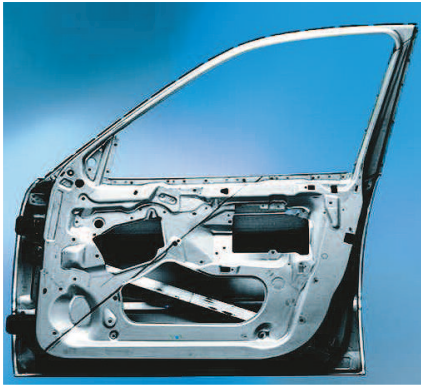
Automobile interior door made of hot-dip galvanized sheet with laser-welded seam
